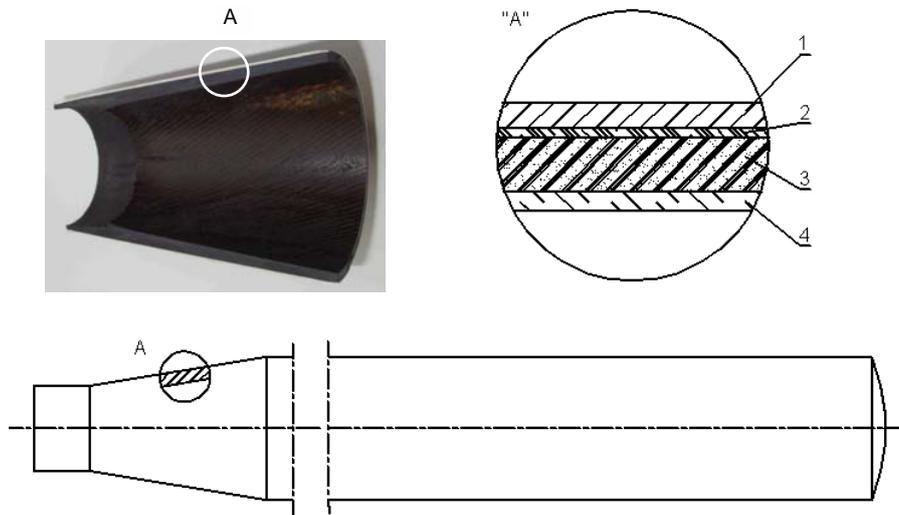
Layout and a photograph of the examined structure, 1- casing of maraging steel, 2 – glue joint, 3 – layer built from synthetic gum with a filler, 4 – carbon fiber laminate
